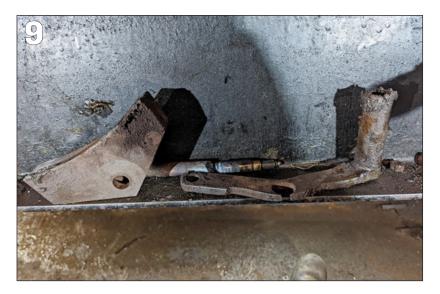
The offending hanger with its spacer - Harry had to cut the pin with a gas axe to get it and the brake block off.
